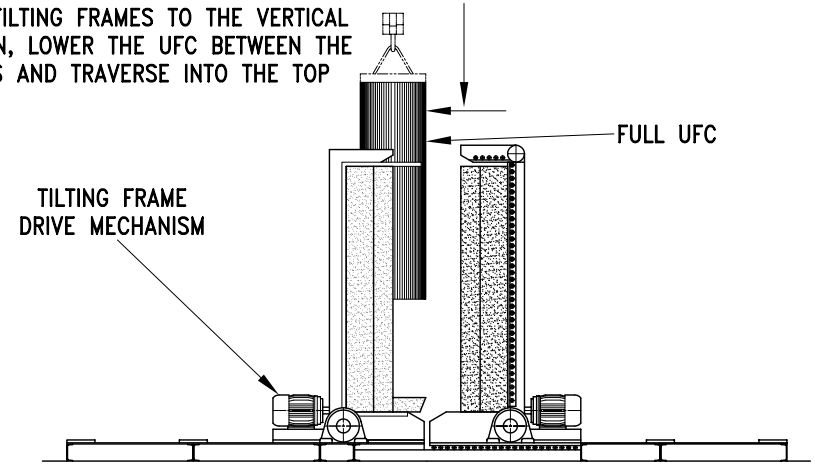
GENERAL ARRANGEMENT OF UFC ELEVATING CART
